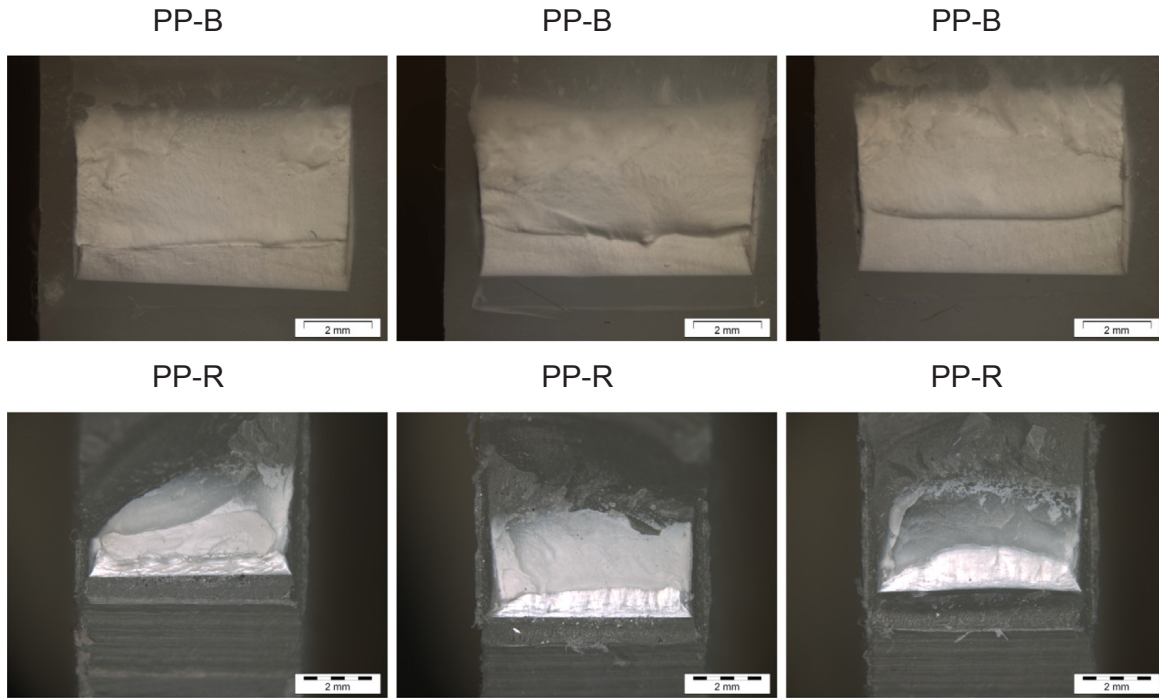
Fracture surface of PP-B and PP-R to present differences in the crack shape and the crack front.
